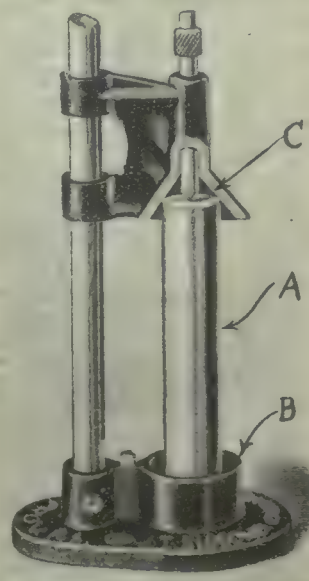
STANDARD FIXTURE USED FOR CENTERING.
